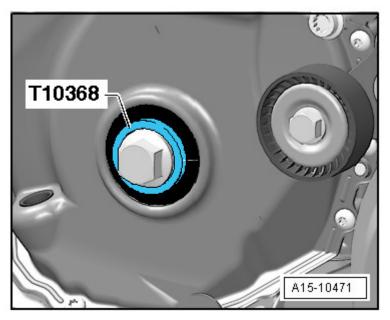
Identifying Vibration Damper Bolt And Thrust Piece T10368 Courtesy of VOLKSWAGEN UNITED STATES, INC.
